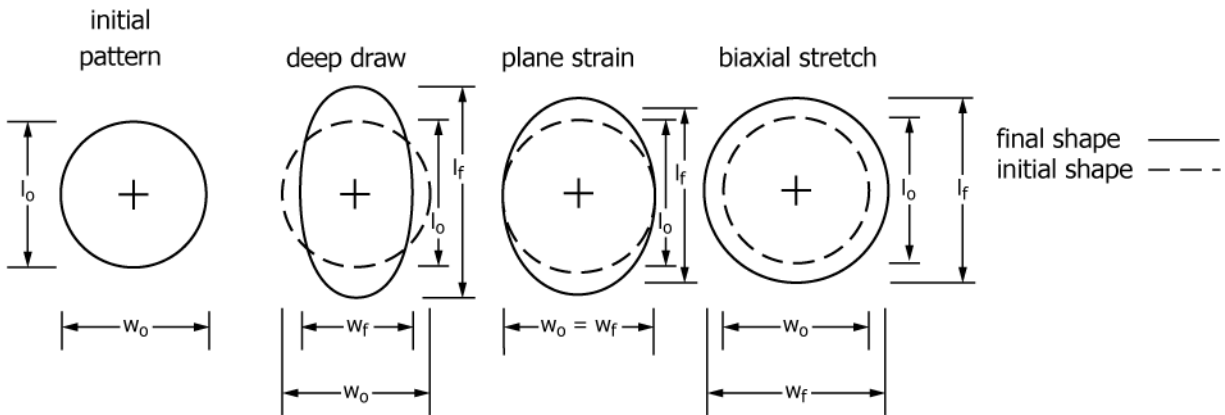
Possible Changes in the Shape of the Circular Grid Pattern Gauge Length Measurement Units Caused by Forming Operations on Metallic Sheet Products
